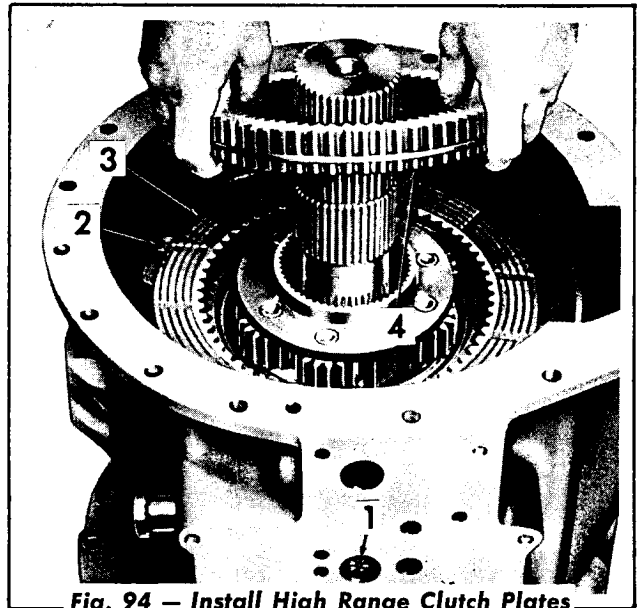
Install High Range Clutch Plates and Ring Gear
